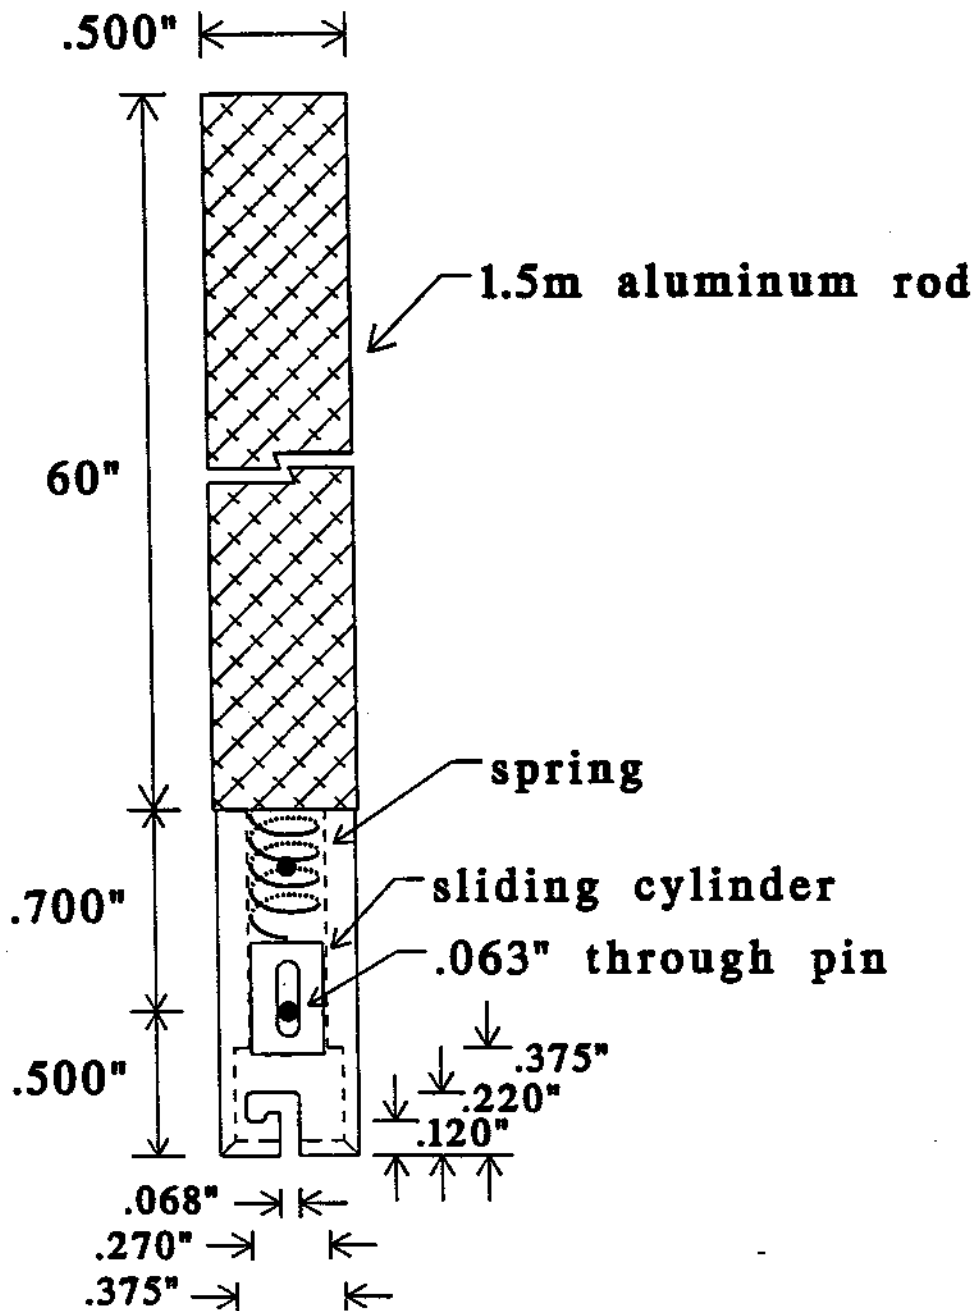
"Bayonet socket" attached (with internal spring) to the end of a 1.5 meter rod used for manipulating the source capsule and plug.
